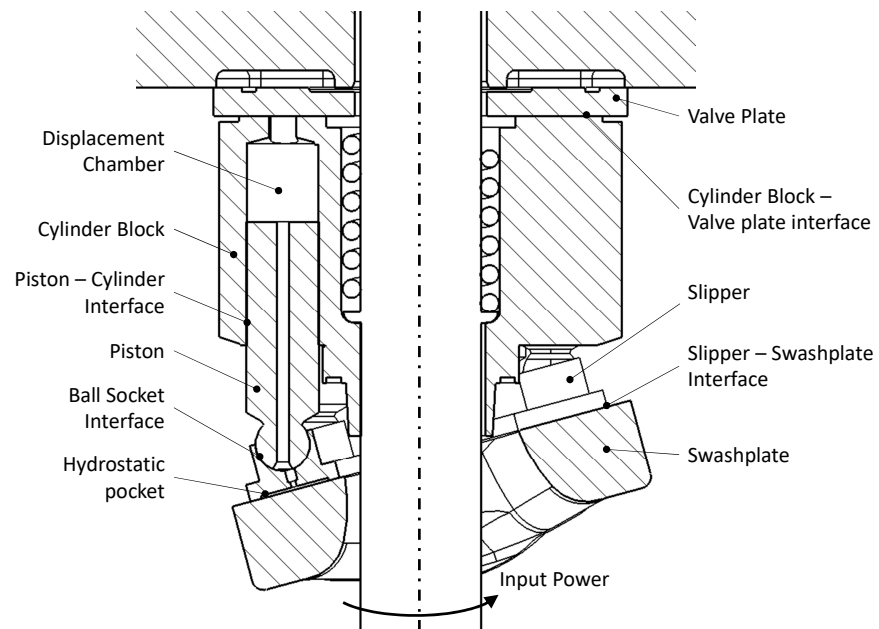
Components of an Axial Piston Machine of Swashplate Type
